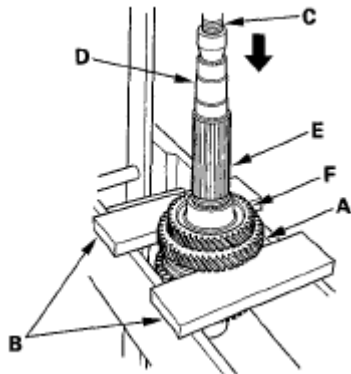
Pressing Countershaft Out Of 3rd Gear
